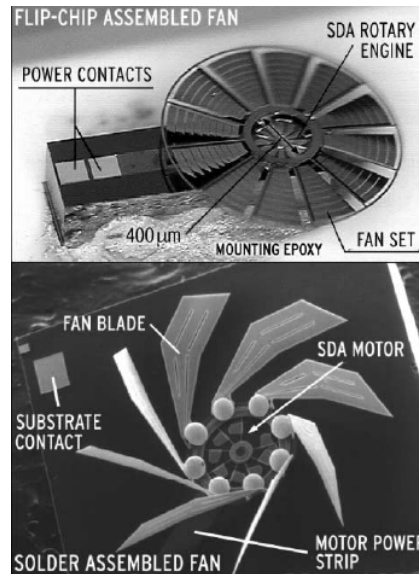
Flip-chip (top) and solder assembly (bottom) micro-fans[1]
